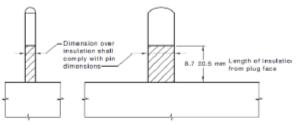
DIMENSIONS OF INSULATION ON INSULATED LIVE PINS
